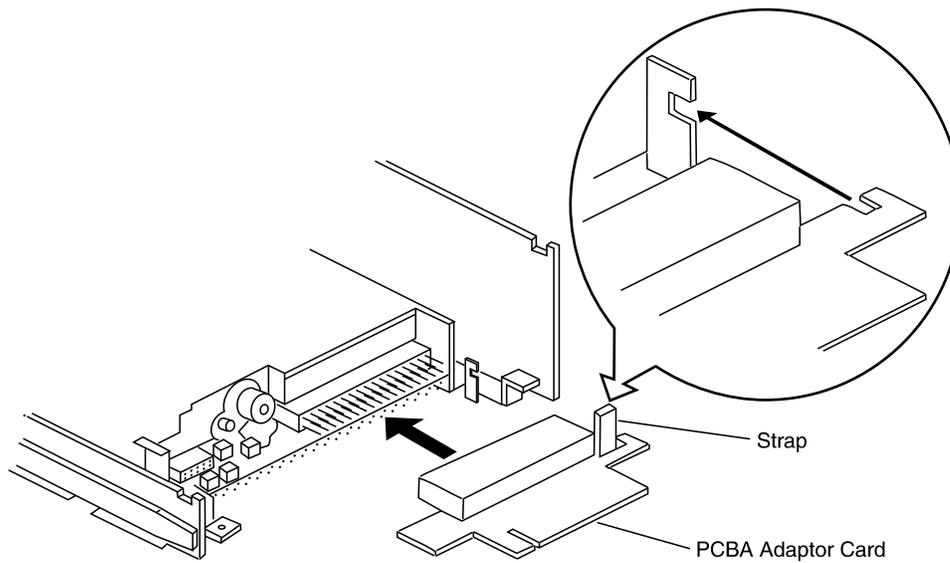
Floppy Disk Drive Unit PCBA 5-Inch Adapter Card
